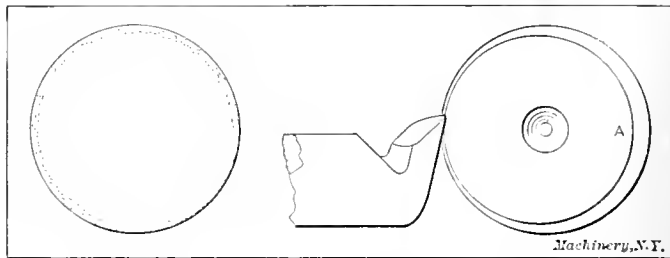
Tool Steel should be centered Concentric, in order to remove the Decarbonized Outer Surface
